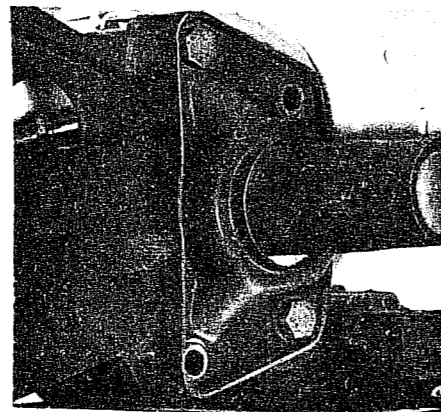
Use two extra long screws initially to draw the spring plate cover up to the housing - D/J axle.
